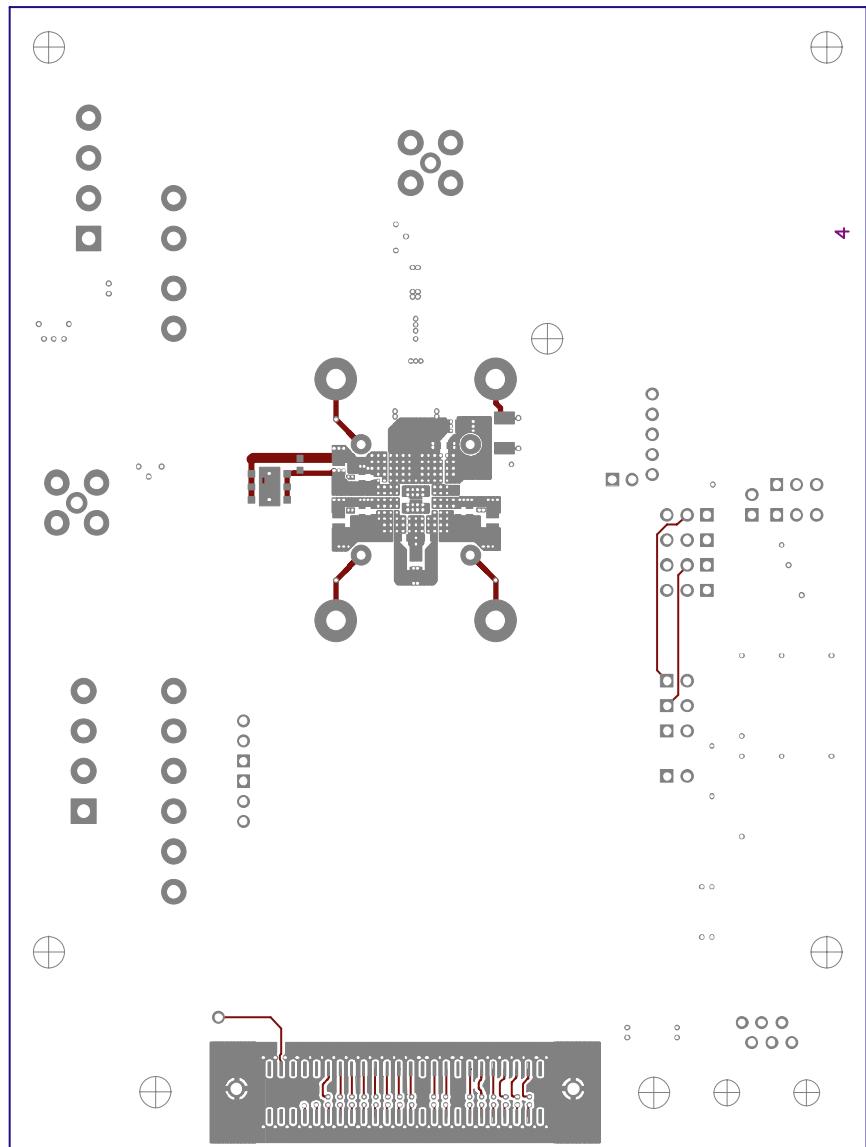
PCB Layout Layer 4, AD973x Evaluation Board, Rev. F
